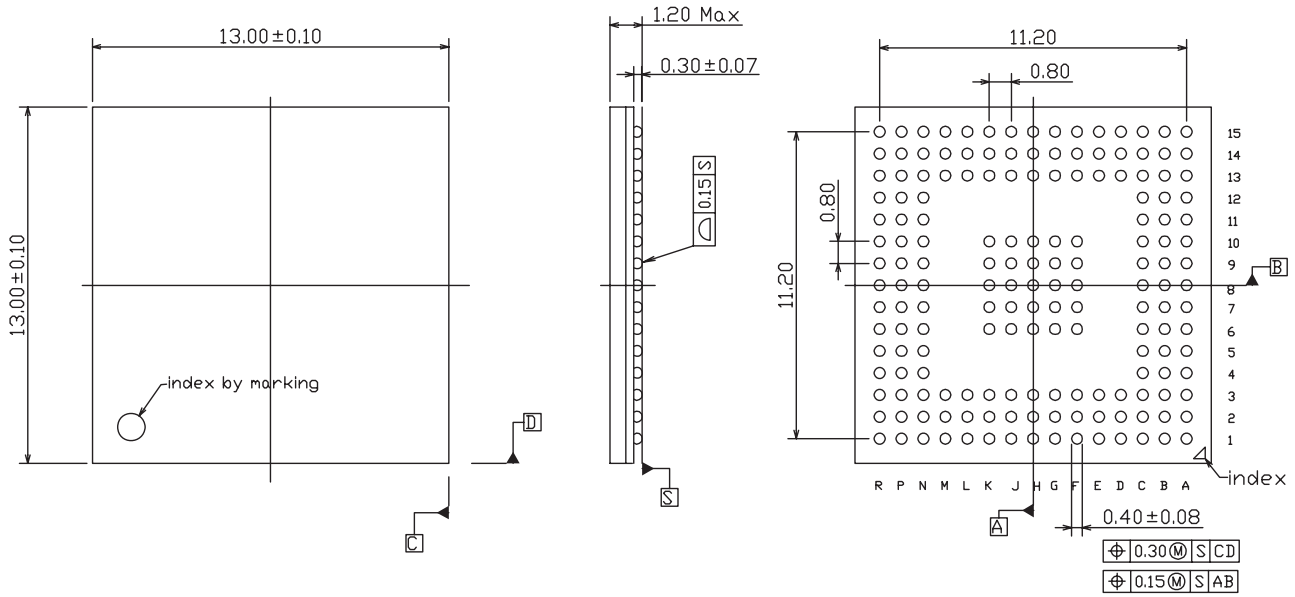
169-pin TFBGA Package Mechanical Dimensions
